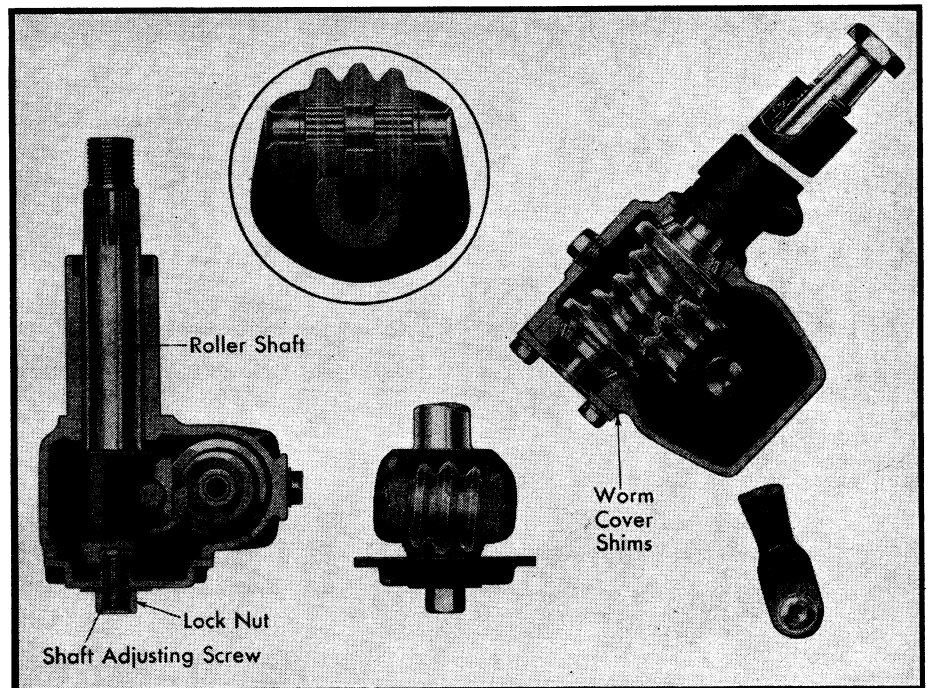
Gemmer worm and roller steering gear. Light and medium duty trucks
